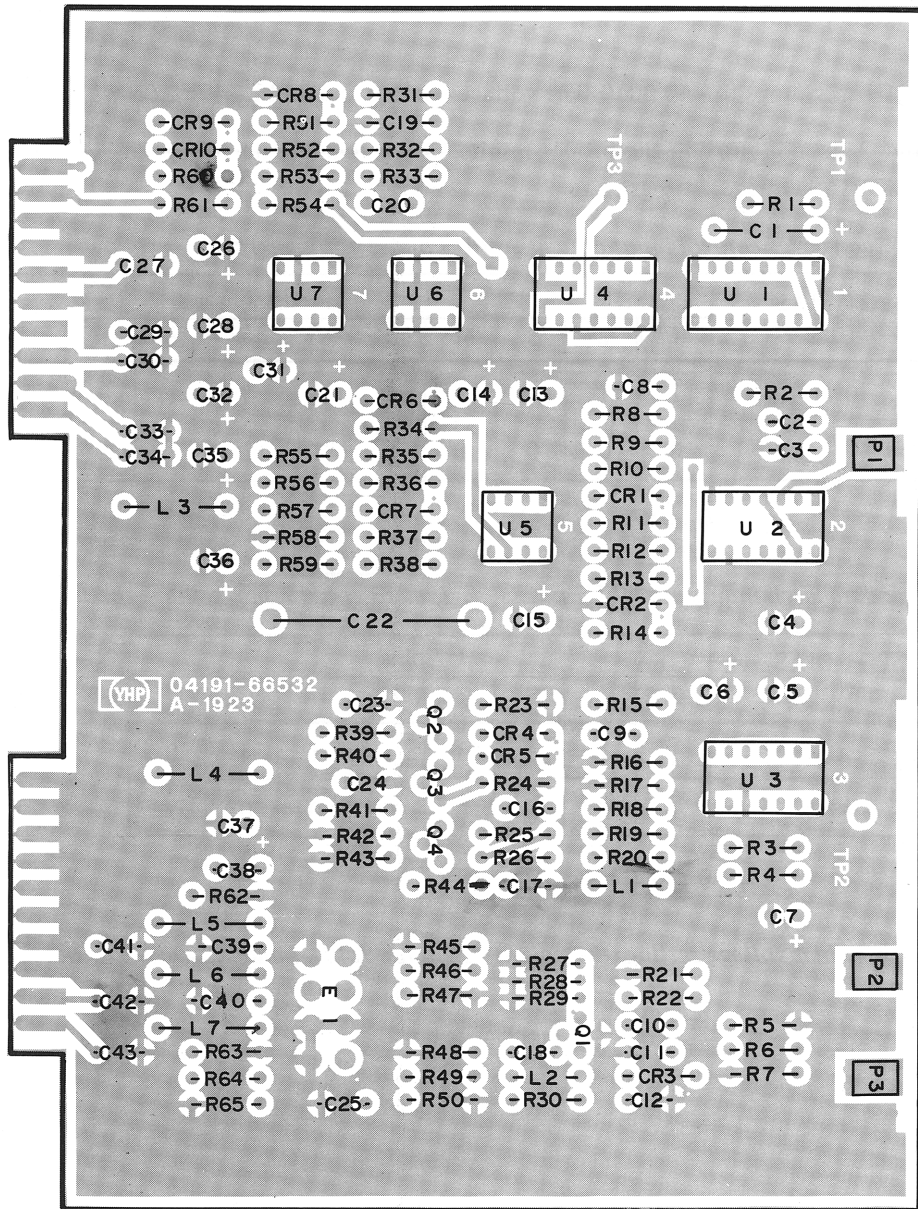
A32 Summing Loop Circuit Board Assembly Component Locations.
